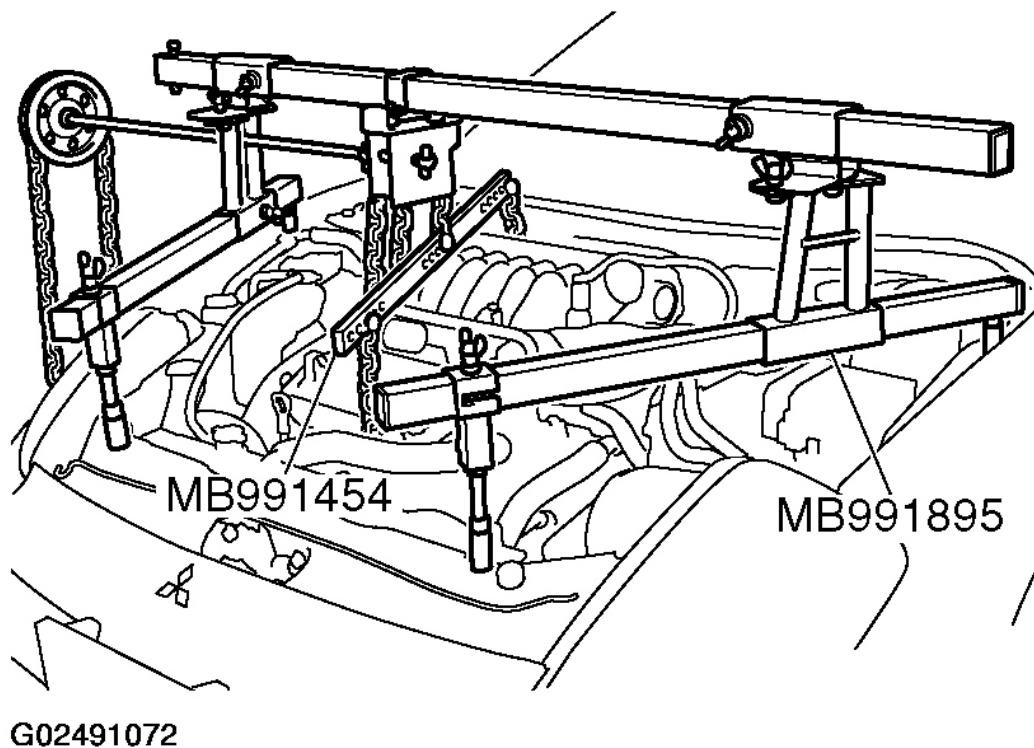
Supporting Engine Assembly With Special Tools MB991895
